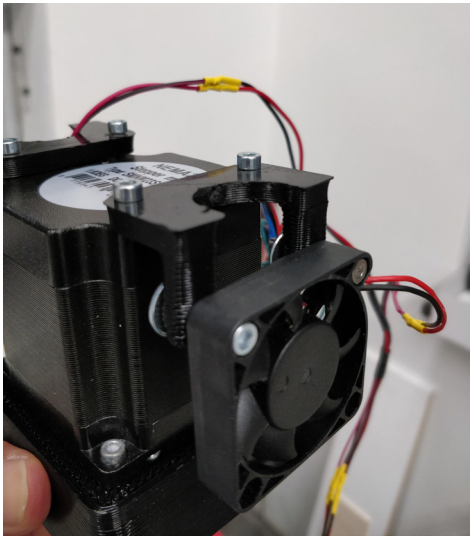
Cooling fan to stepper motor connector part, 3D printed in black PLA. Source: Author.
